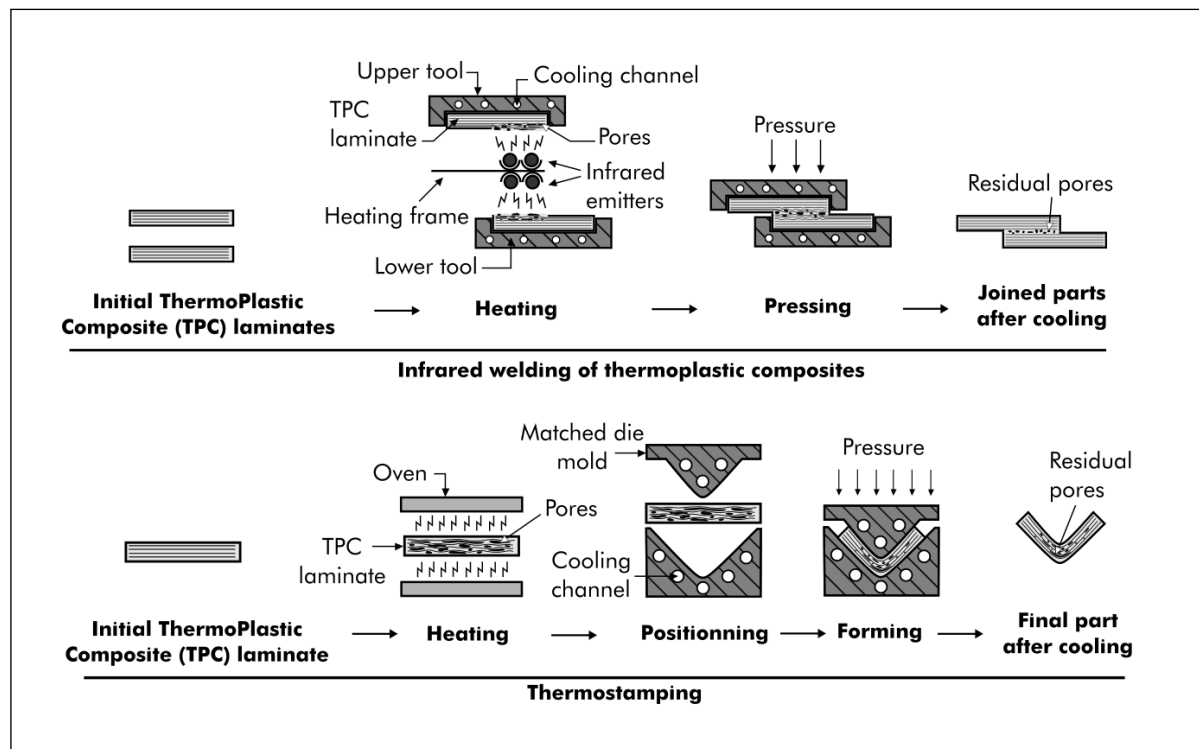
Example of thermoplastic welding and forming process.
